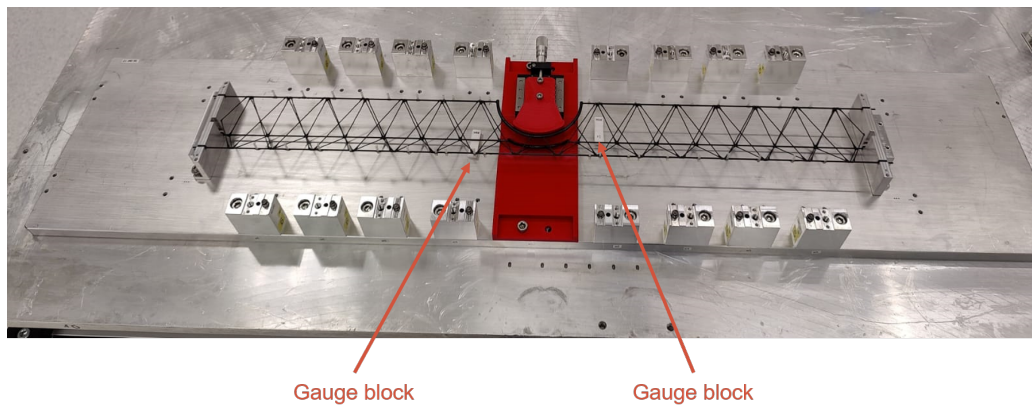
Assembly of a prototype of the central ladder using a specifically designed tool to support the cut out in the central ladder and gauge blocks to avoid sagging in the ladder during the assembly.
